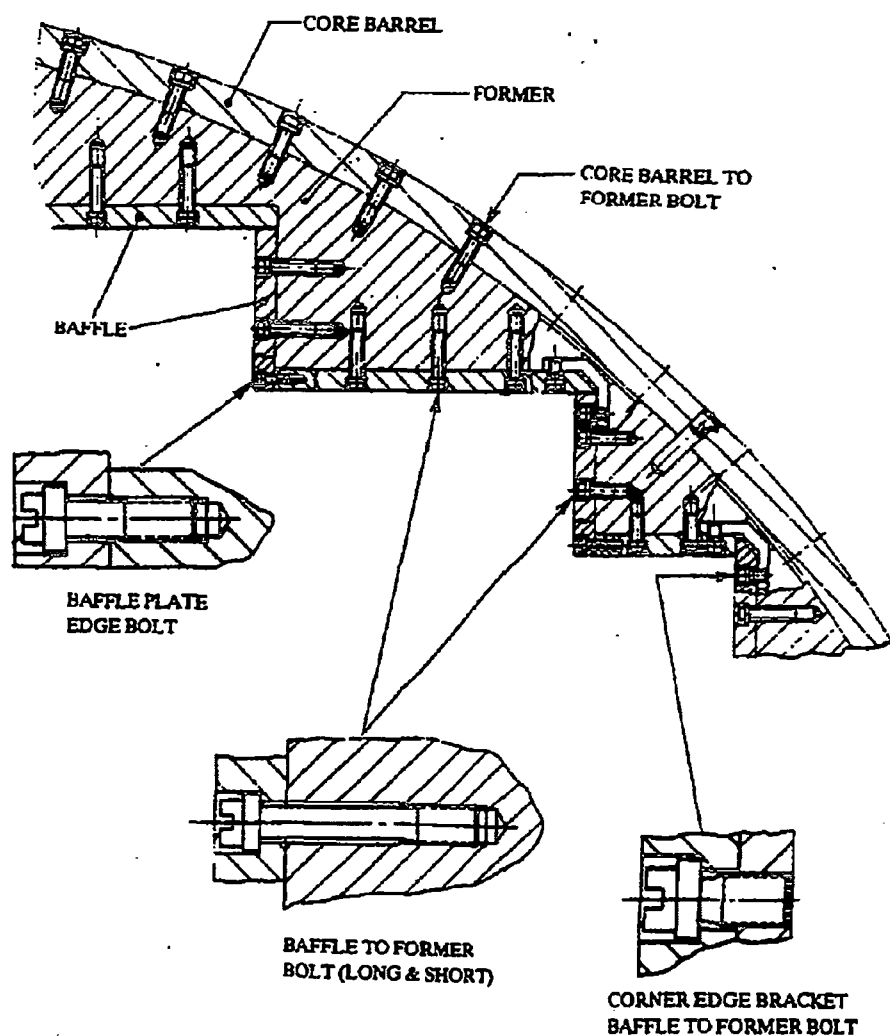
Bolting in a Typical Westinghouse Baffle-Former Structure
